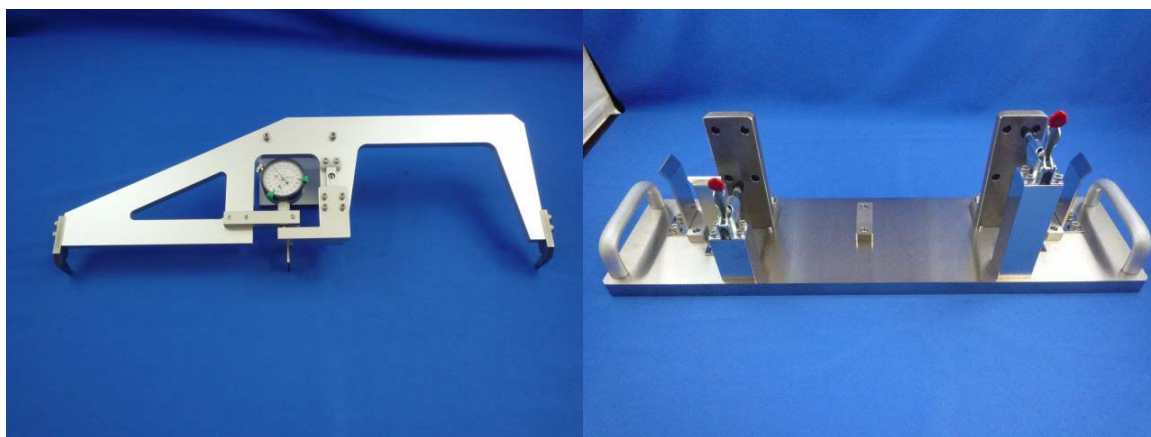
PF Roller Adjustment Jig and PF Roller Adjustment Jig Stand
